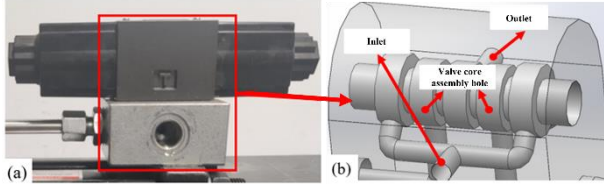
(a) Integration of the traditional prototype valve body and manifold block; (b) Integrated valve body and manifold block integration
